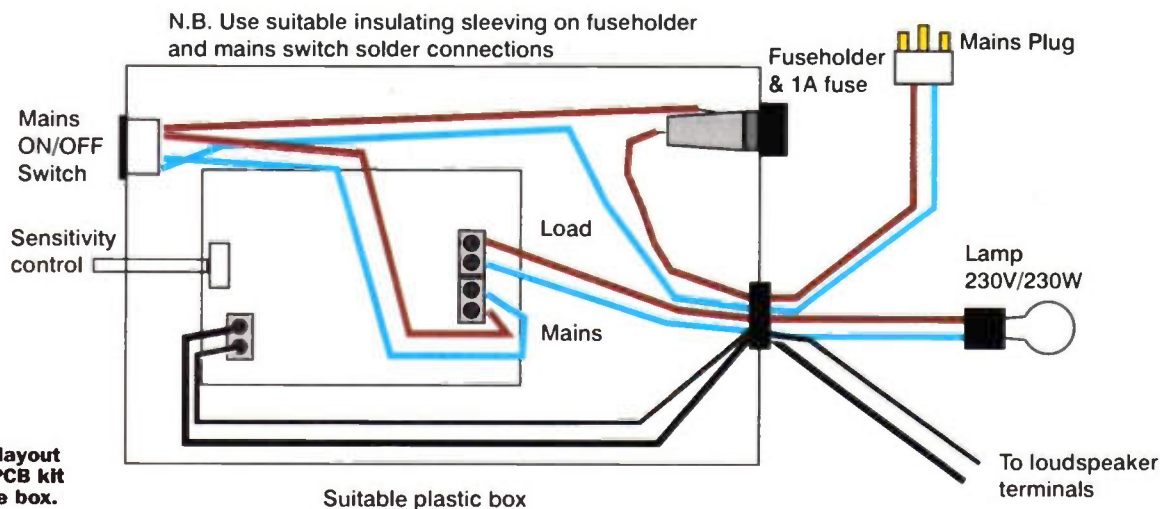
Suggested layout of placing PCB kit in a suitable box.
